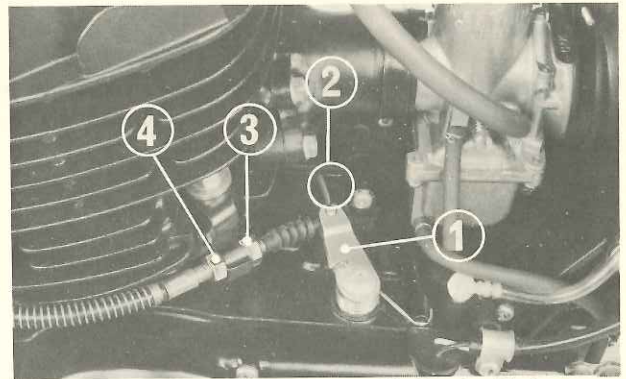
(1) Clutch lifter lever (2) Index mark (3) Lock nut (4) Clutch cable lower adjuster
